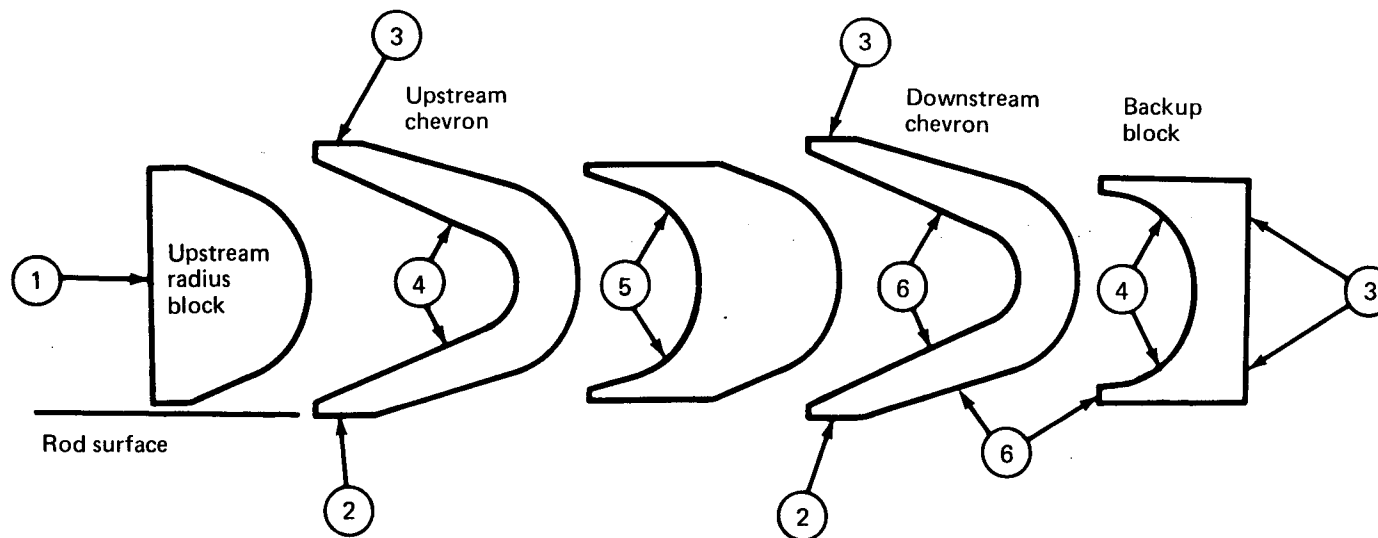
2.54 CM (1.0 IN.) CHEVRON SEAL AFTER TEST
